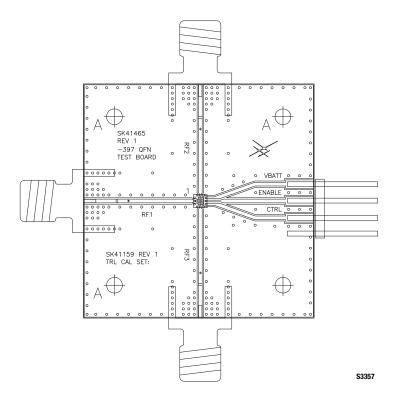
SKYA21013 Evaluation Board Assembly Diagram
